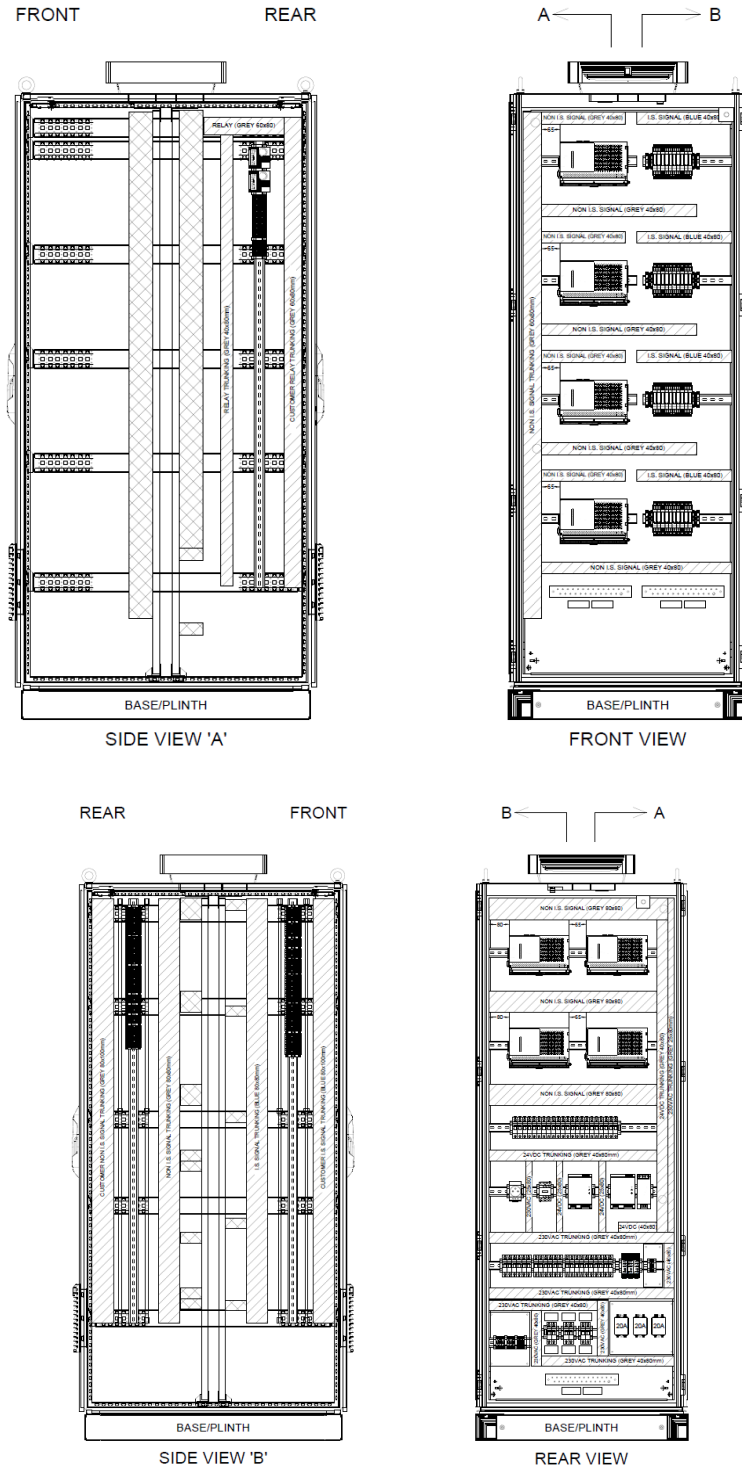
BNAPMC-04 3500 Swing Frame Front Access Cabinet
